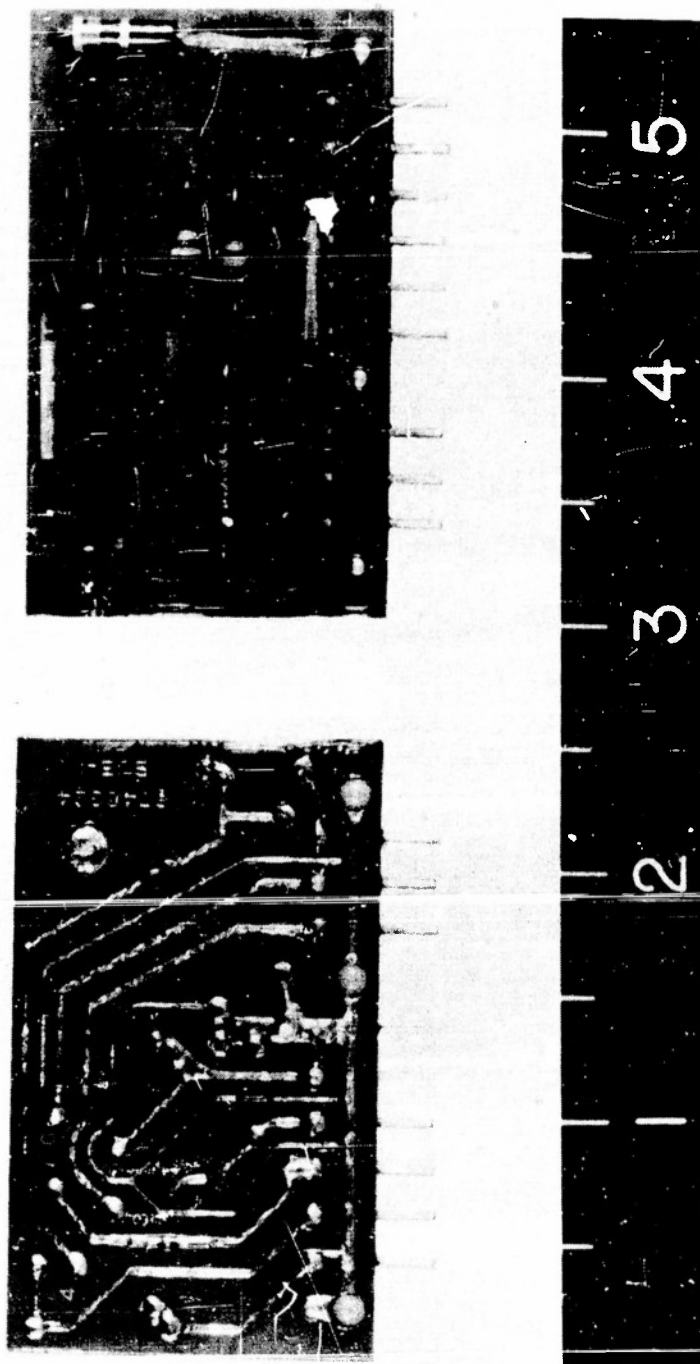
PLUG-IN OSCILLATOR ASSEMBLY
